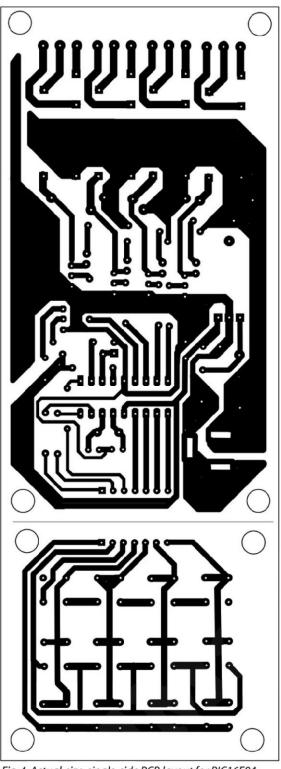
Actual-size, single-side PCB layout for PIC16F84-based coded device switching system
